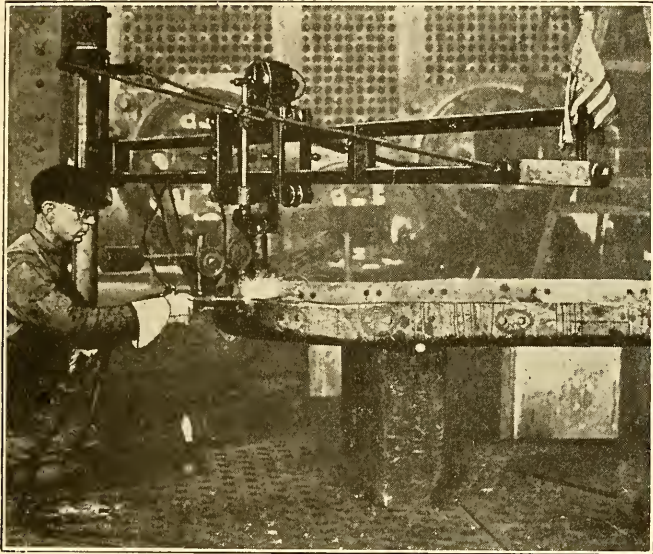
Pyrograph Trimming and Beveling Boiler Flanges.
